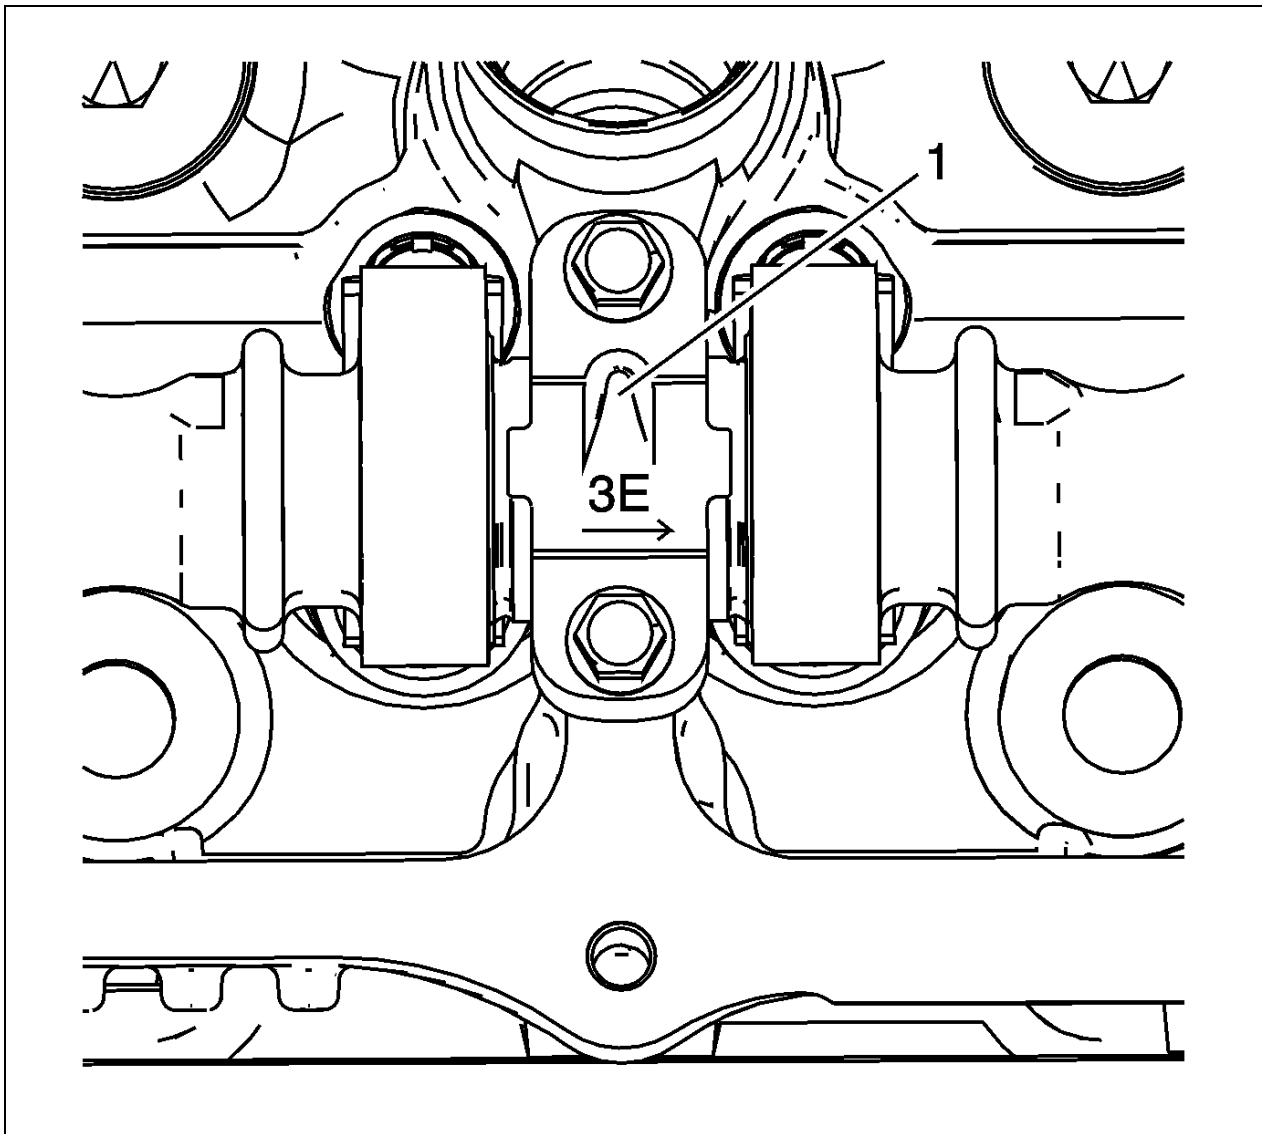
Identifying Camshaft Neutral (Low Tension) Position
